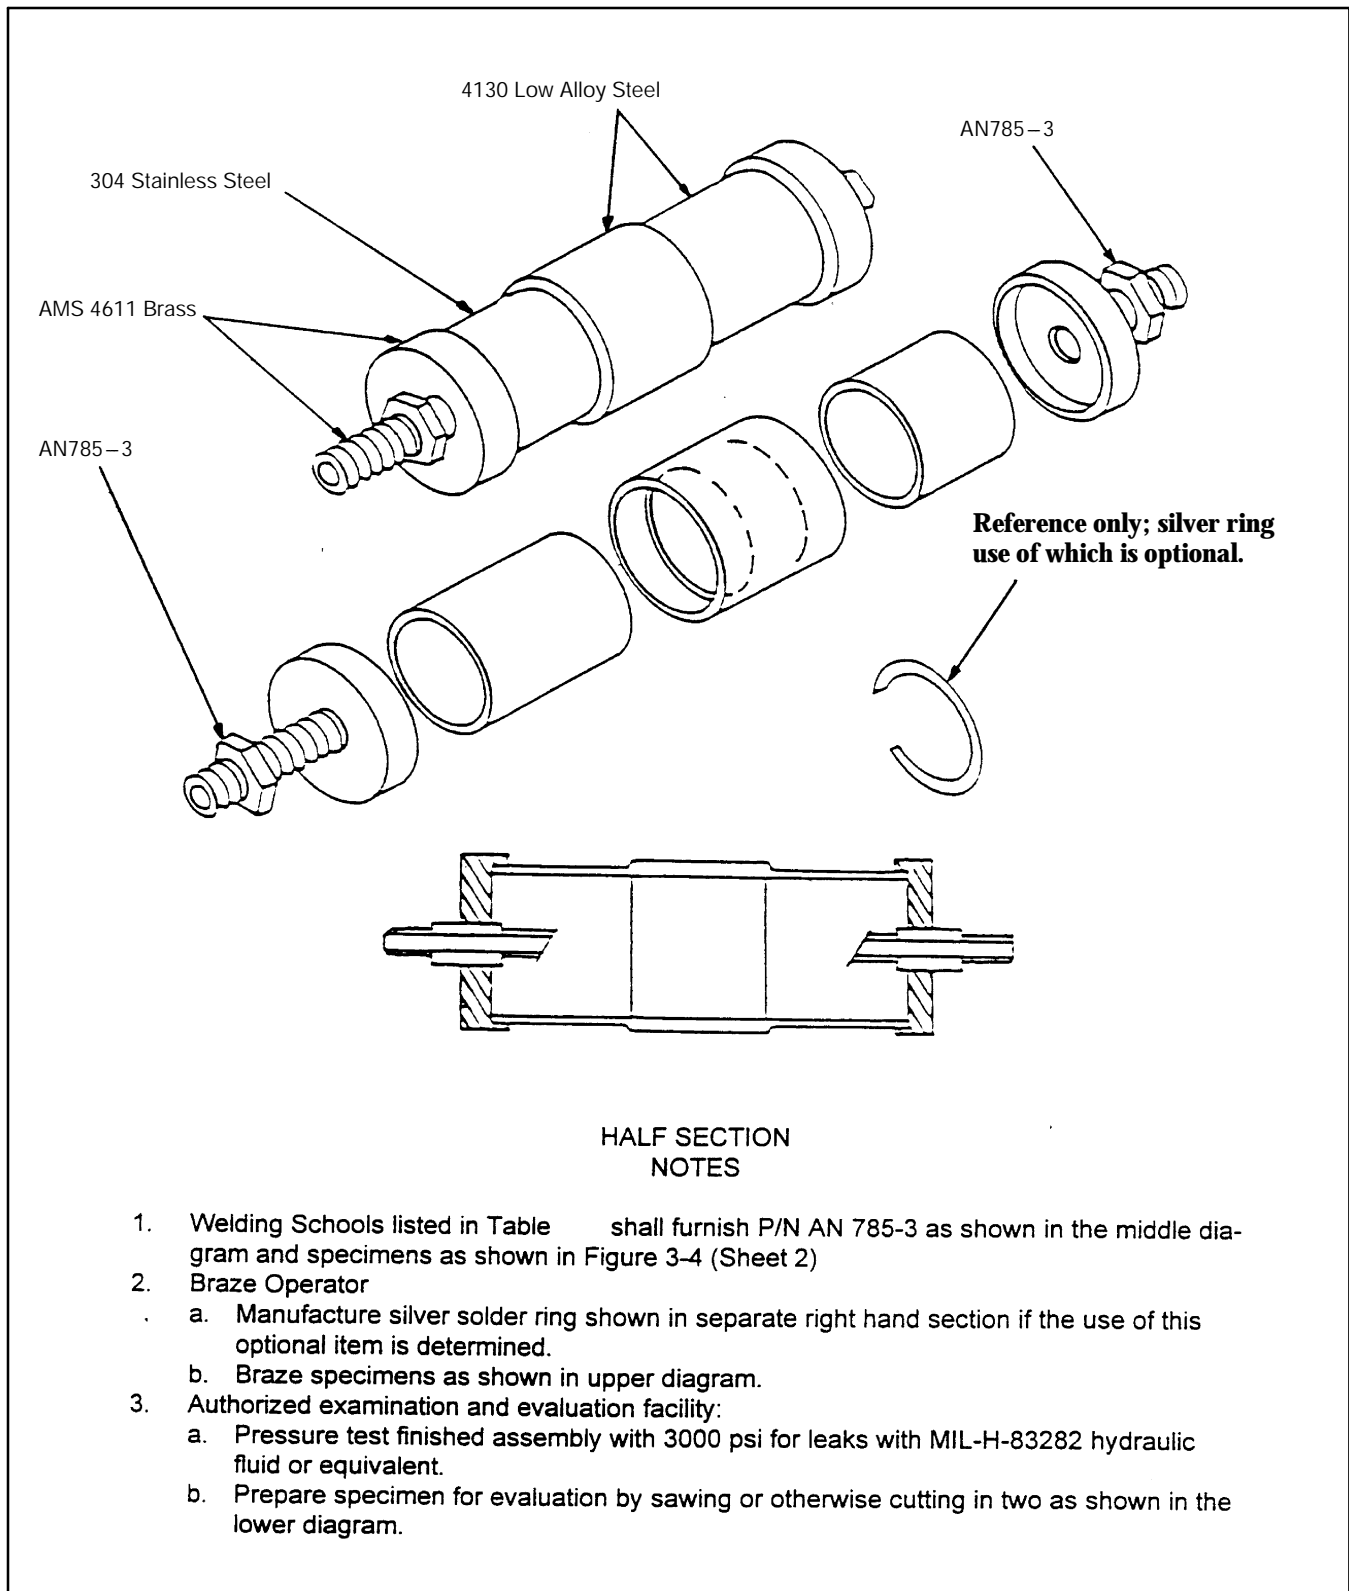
Specimen Requirement for Silver Brazing (Sheet 1 of 2)
